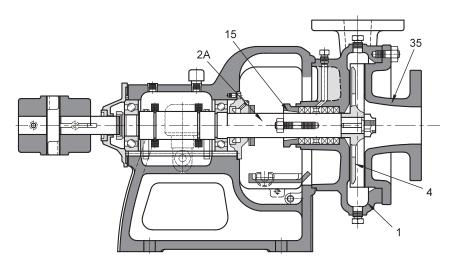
Section of an end-suction, single-stage centrifugal pump used for light duty (numbers refer to parts listed in Table 3.14).
